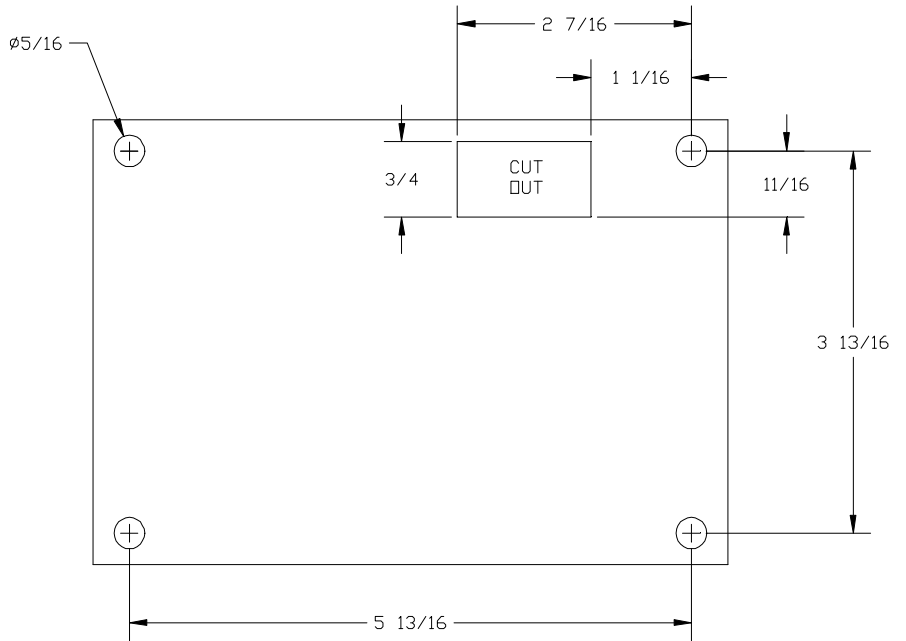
Data Entry Panel Mounting Cutout Dimensions
